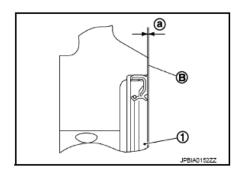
Identifying Rear Oil Seal Pressing Dimension Courtesy of NISSAN MOTOR CO., U.S.A.
